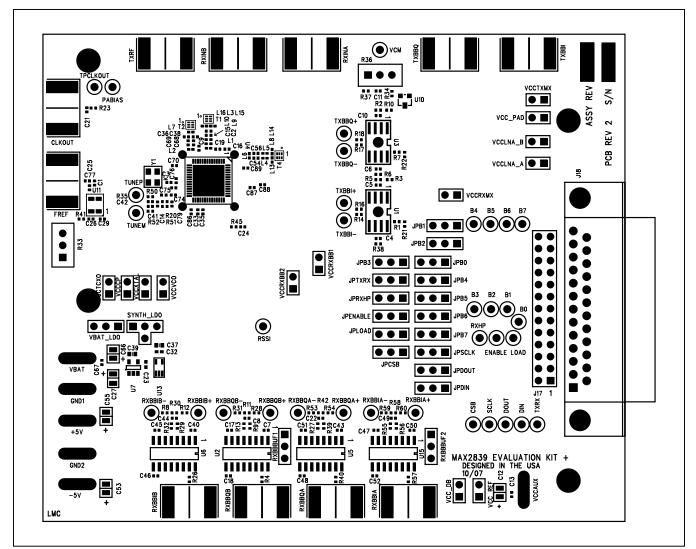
MAX2839 EV Kit PCB Layout—Top Silkscreen
